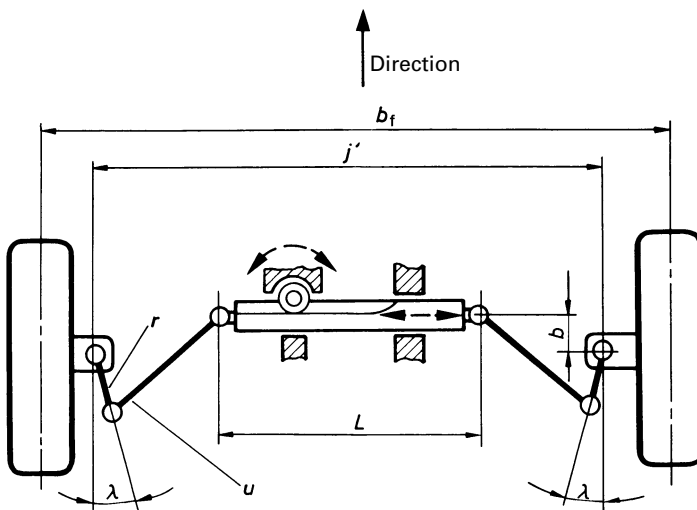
The steering is in front of the wheel centre and the triangular linkage behind it, with the inner joints fixed to the ends of the steering rack.
